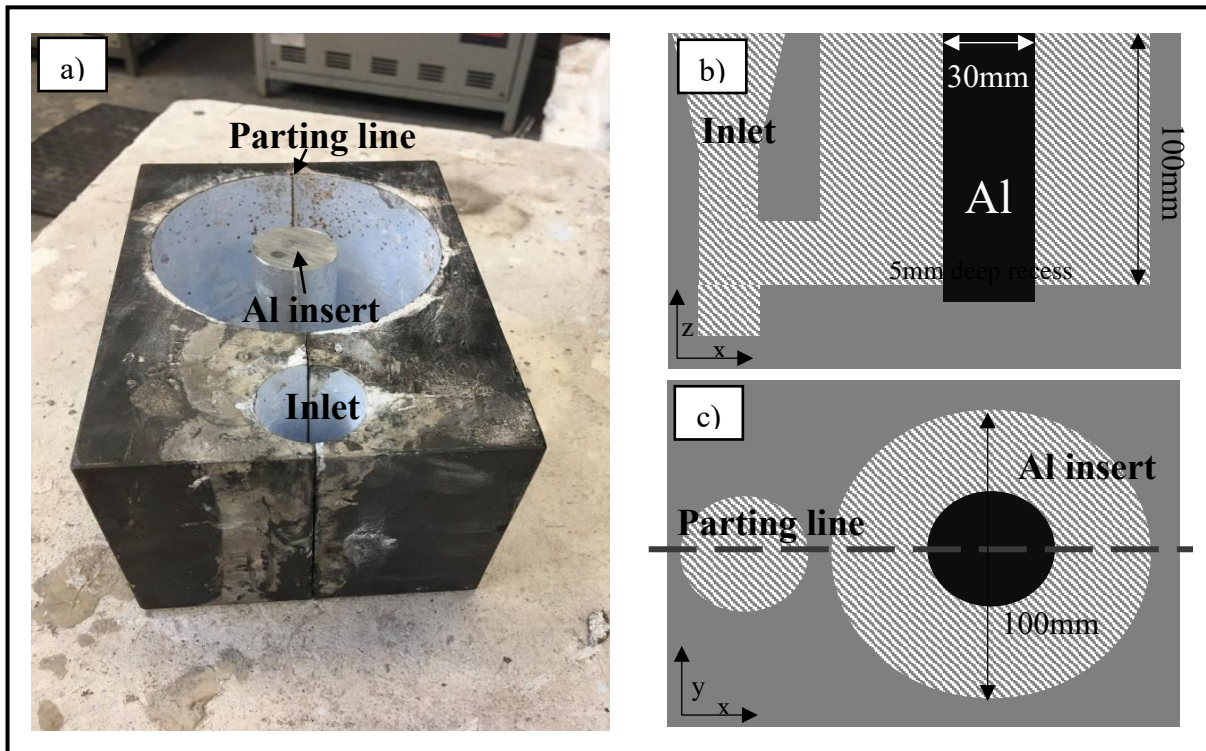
Mould 4: (a) photograph of the mould and the Al cylinder insert placed therein; (b) side plan view of the mould along the parting line; and (c) top plan view of the schematic of the mould.
